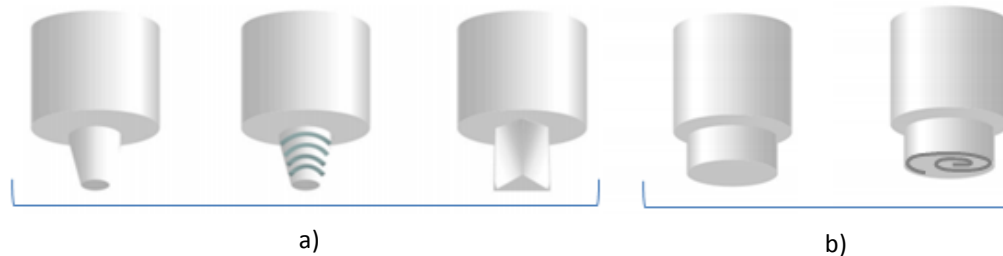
FSW tool geometries a) FSW tools with different pin geometries and features, b) FSW pinless tools (flat shoulder and scroll profiled shoulder) (adapted [12]).
